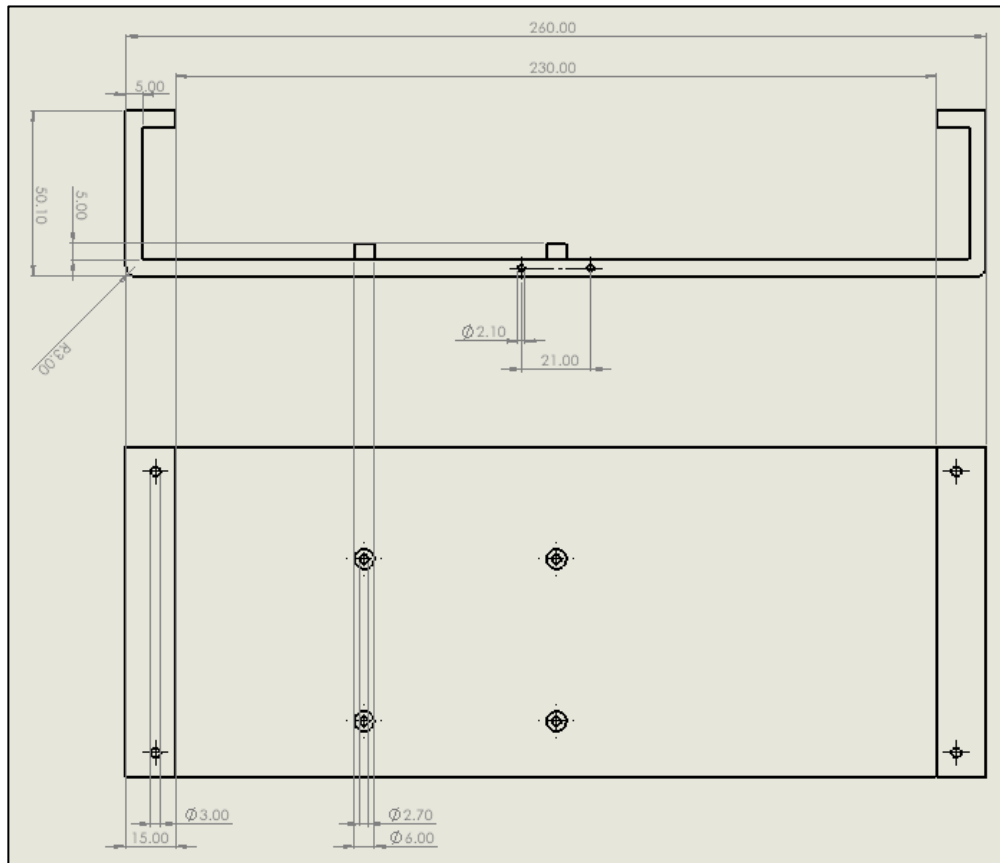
Technical drawing of the base plate for mounting servo motors and housing Raspberry Pi 4 and camera module
